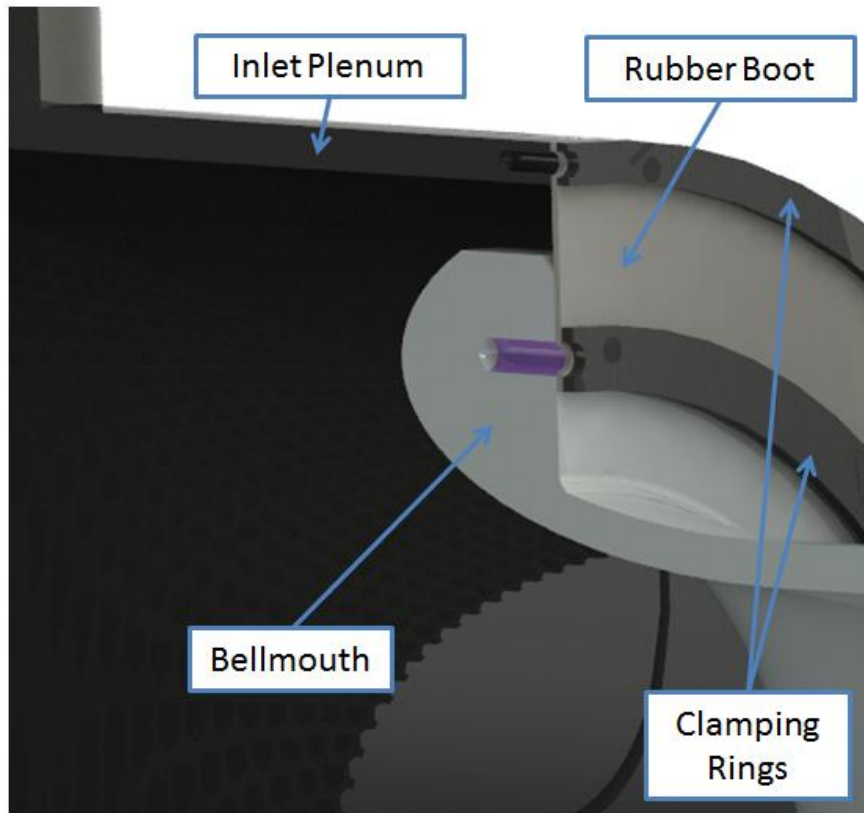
Bellmouth and inlet plenum coupling using clamping rings and rubber boot.
